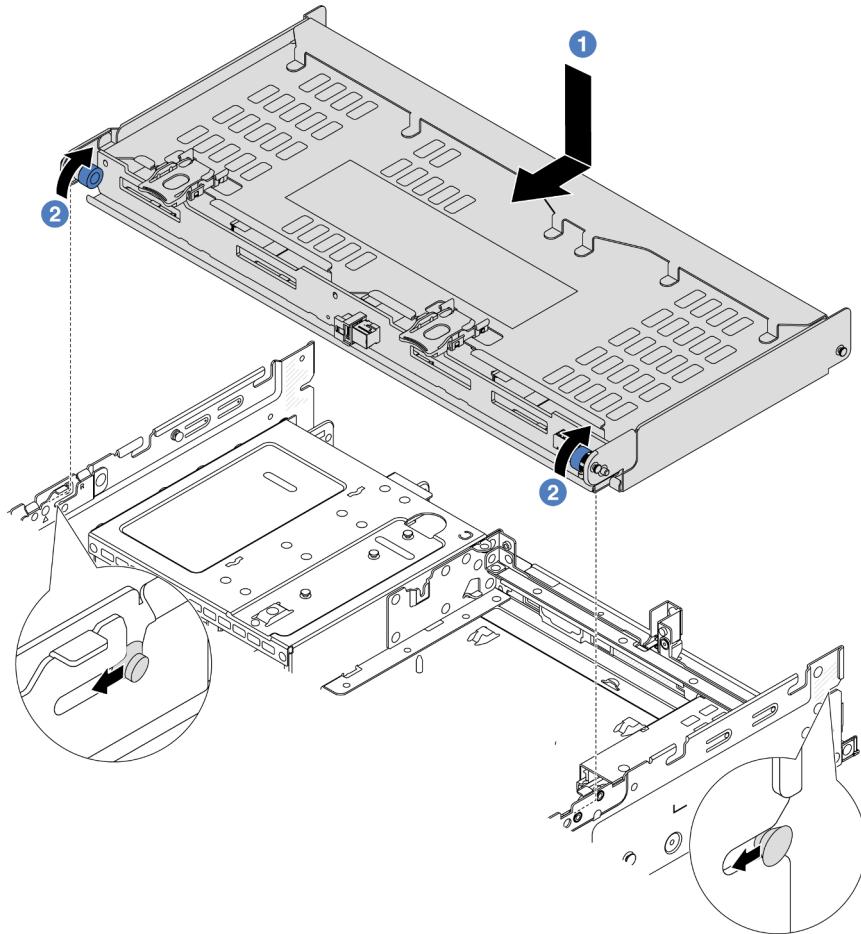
Installing the 4 x 3.5-inch rear drive cage
